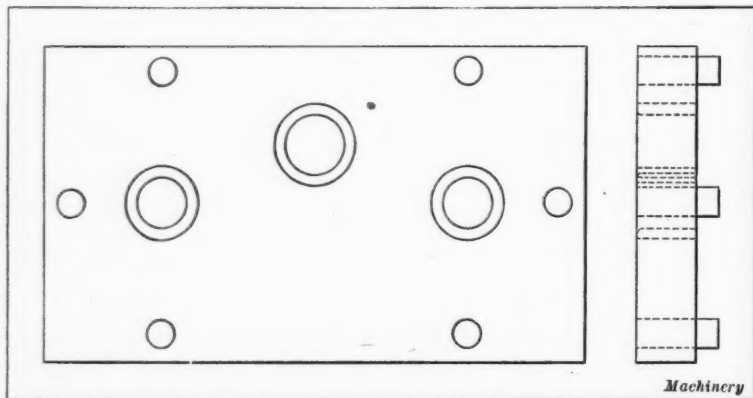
Suitable Jig for making Piece shown in Fig. 8 in Small Quantities
